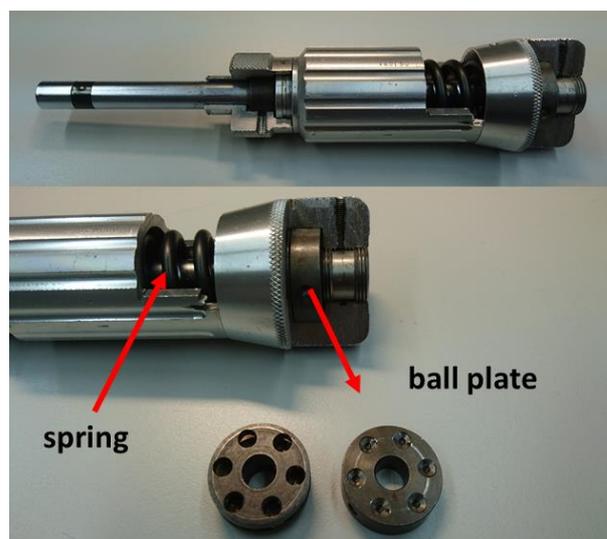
Partial cross-section of a torque screwdriver. The lower part shows the ball plates responsible for the setpoints. The spring used for setting the torque is also indicated
